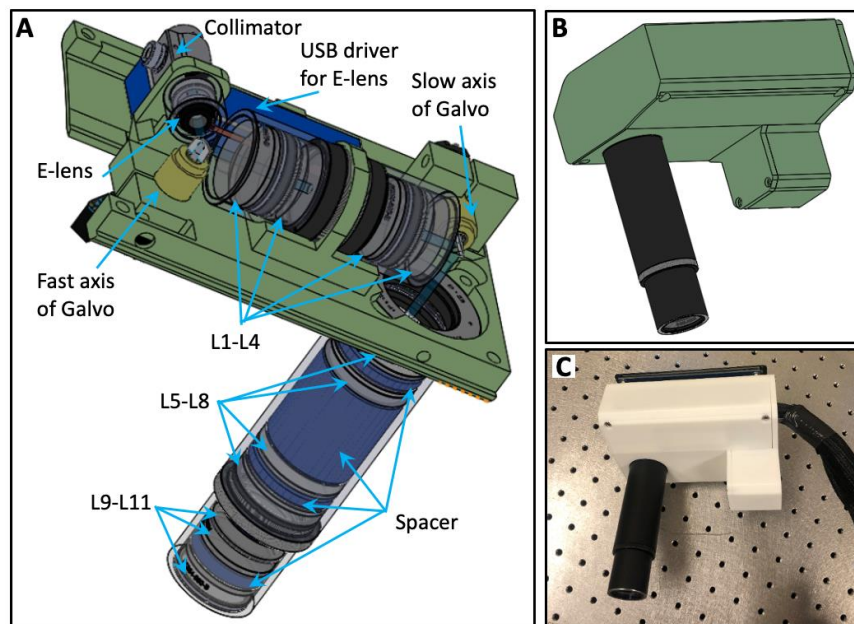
(A) Mechanical layout of the key components of the probe. (B) Appearance of the fully assembled probe in SolidWorks. (C) Photograph of the probe with 3D printed enclosure. E-lens: electrically tunable lens.
